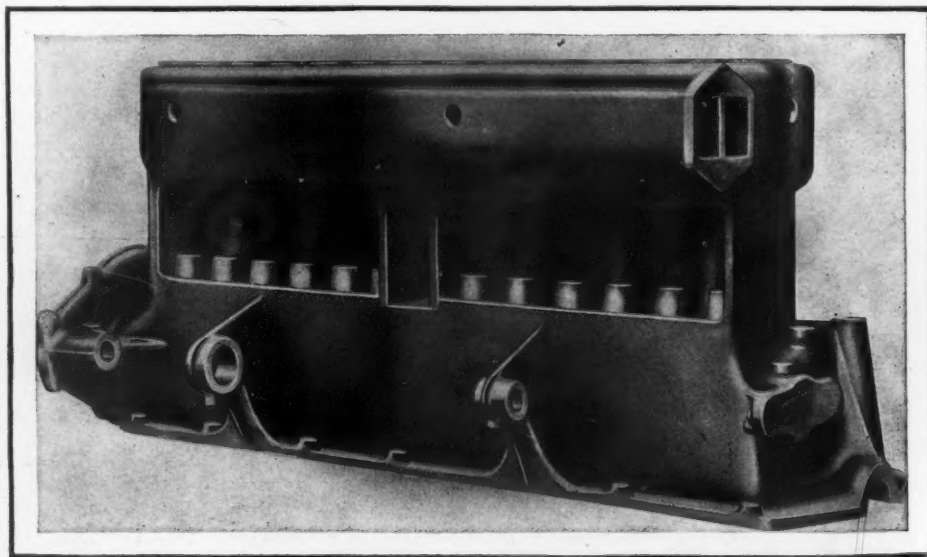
EN BLOC CASTING OF EVERITT SIX-CYLINDER MOTOR
